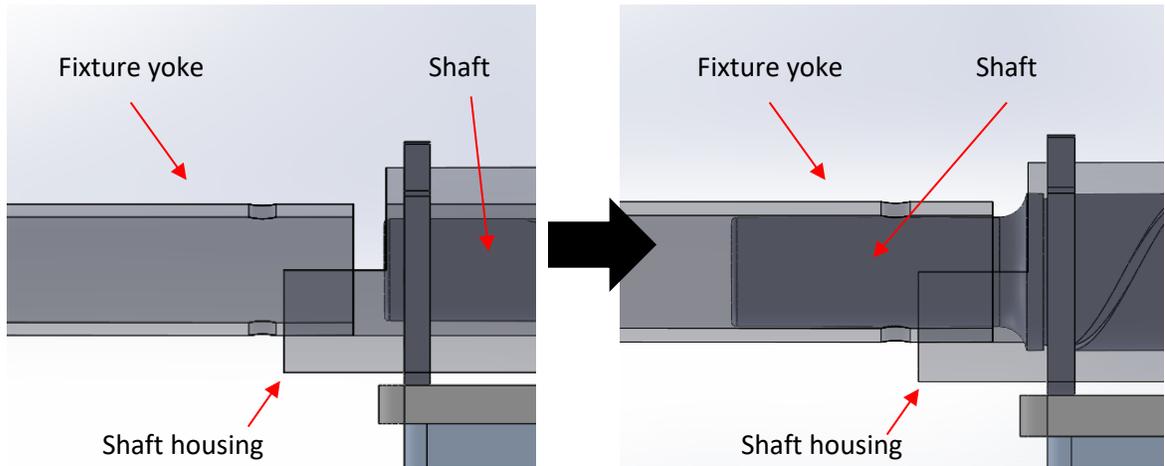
Illustration of Coupling Fixture Yoke to Shaft with Shaft Housing, Side View
